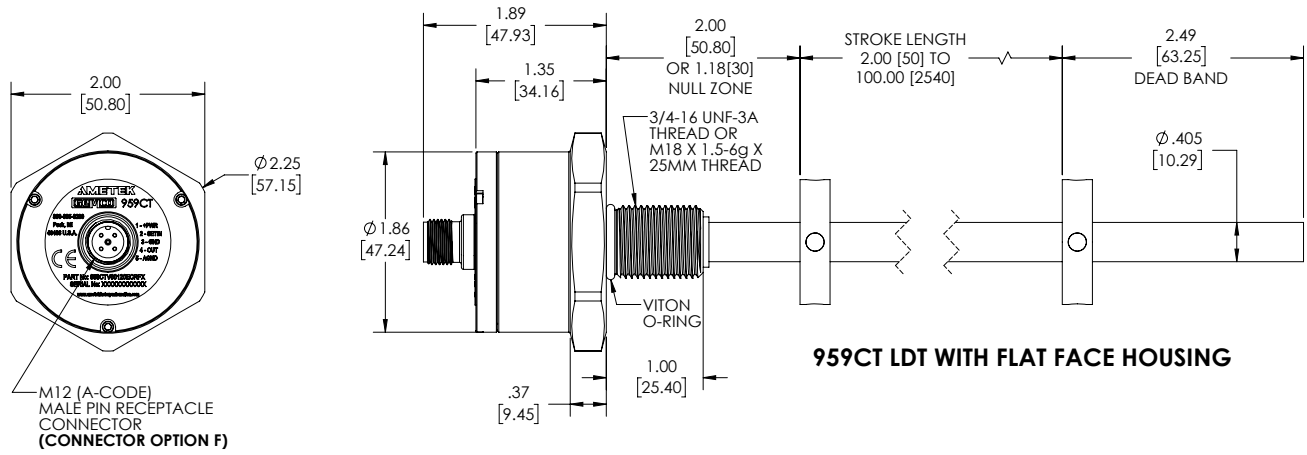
959CT – Dimension drawing (PD-0129100)
